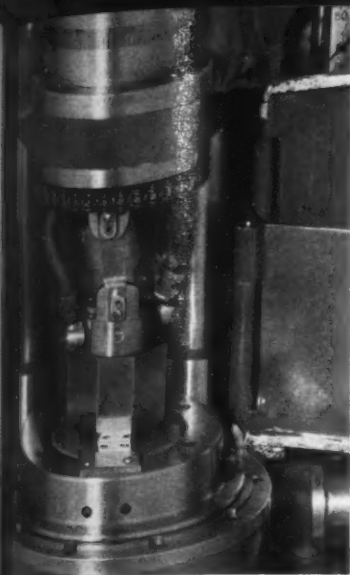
Left — Semi-universal link acts as a crank to drive spindle when slide is tilted. Chain provides spindle drive from jackshaft
